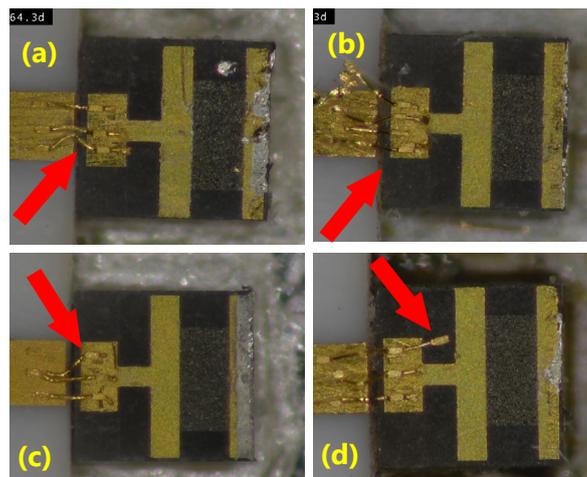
Bad mounting practices: (a) poor wire bond connection to the pad, (b) air gap between the termination and the application board, (c) poor wire bond, (d) wire bond sticking out of the pad area
